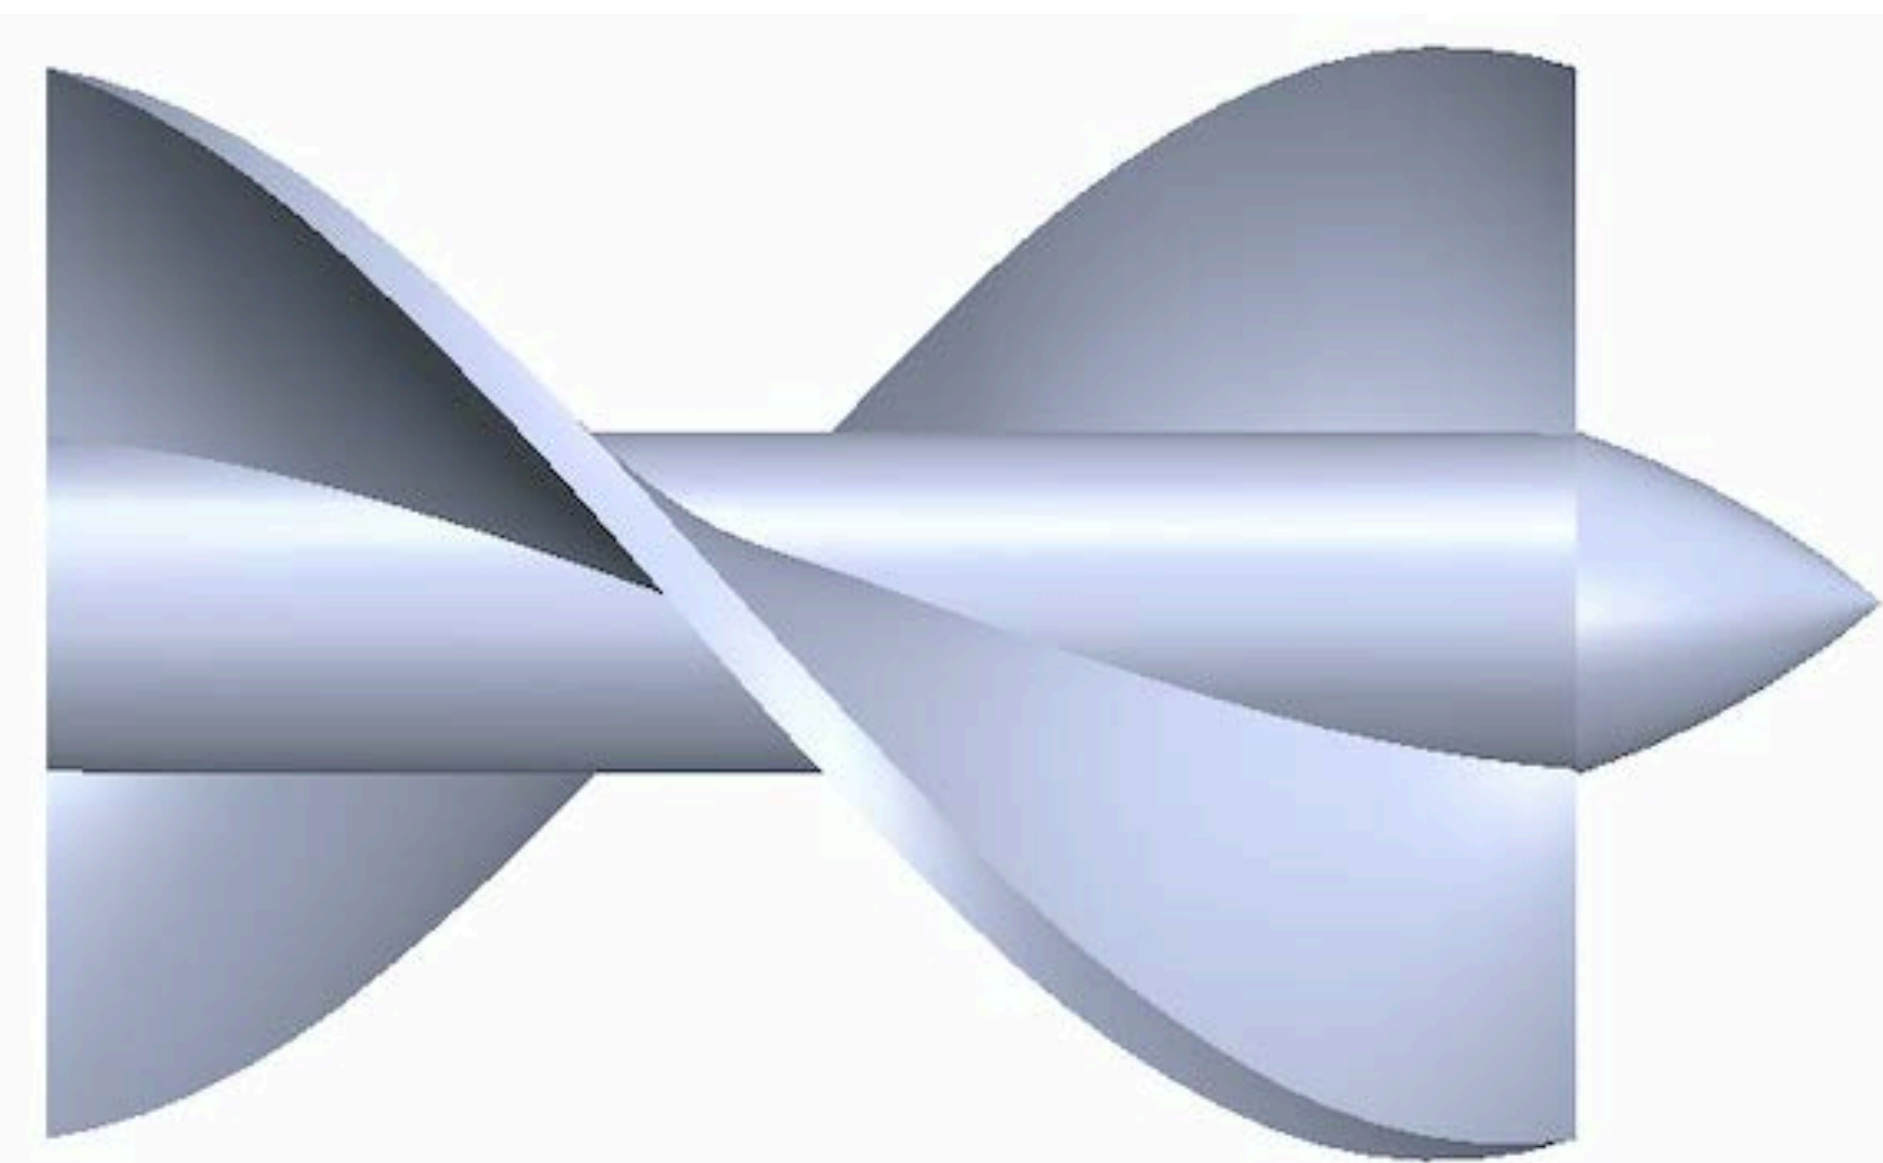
Rendering of the impeller of our best pump, Pump 3. It is a square-edge impeller.
